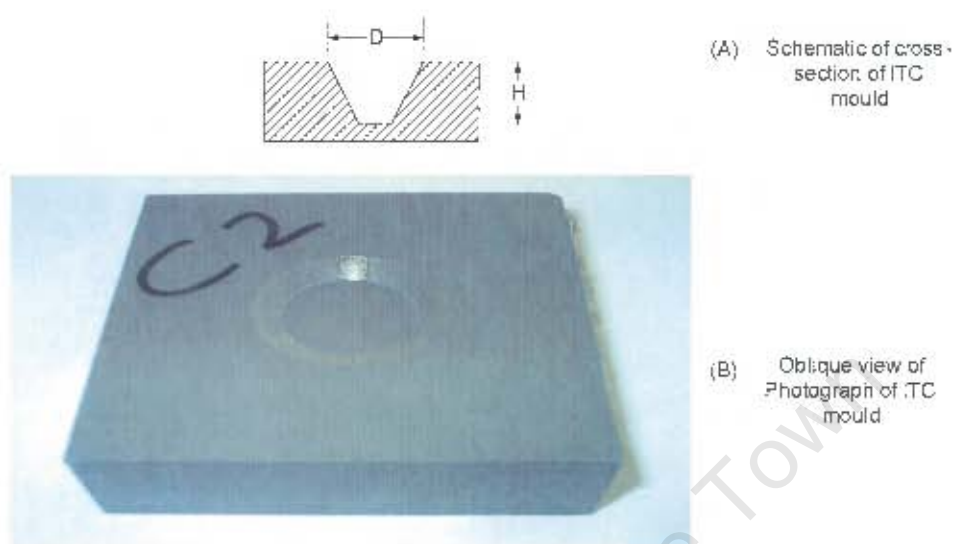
Photograph and schematic of an ITC/TC explosive mould.
